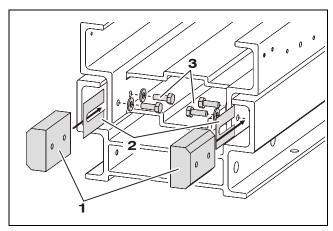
Bottom of Mast Section-2 -Slide Pad Installation
